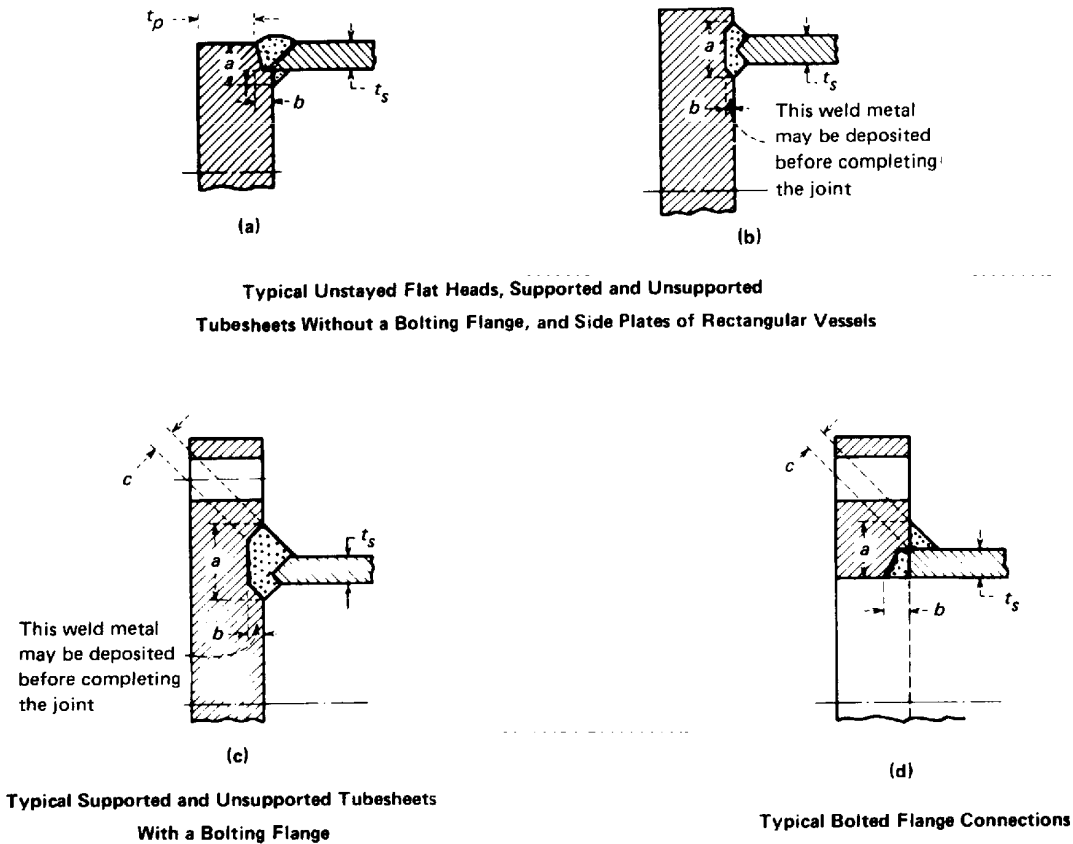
ATTACHMENT OF PRESSURE PARTS TO PLATES TO FORM A CORNER JOINT
